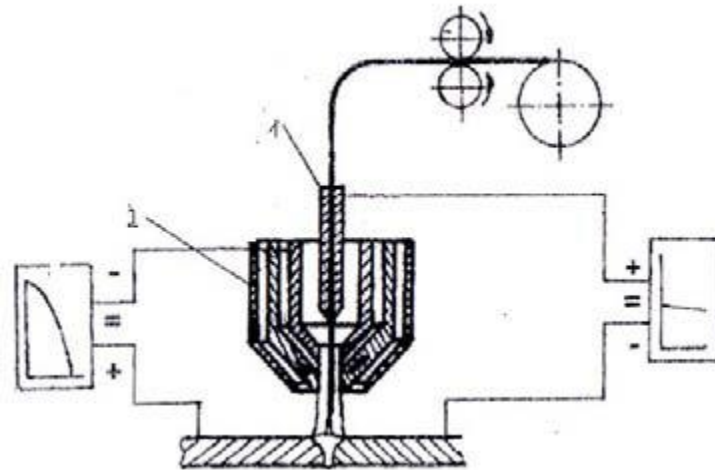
Principle of plasma – MIG hybrid welding (1- MIG, 2 -Plasma)
